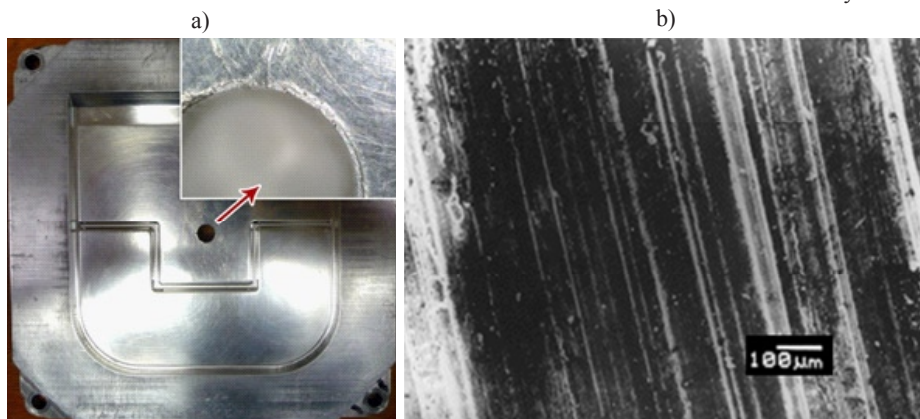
Insert for injection molding with highlighted damaged surface
